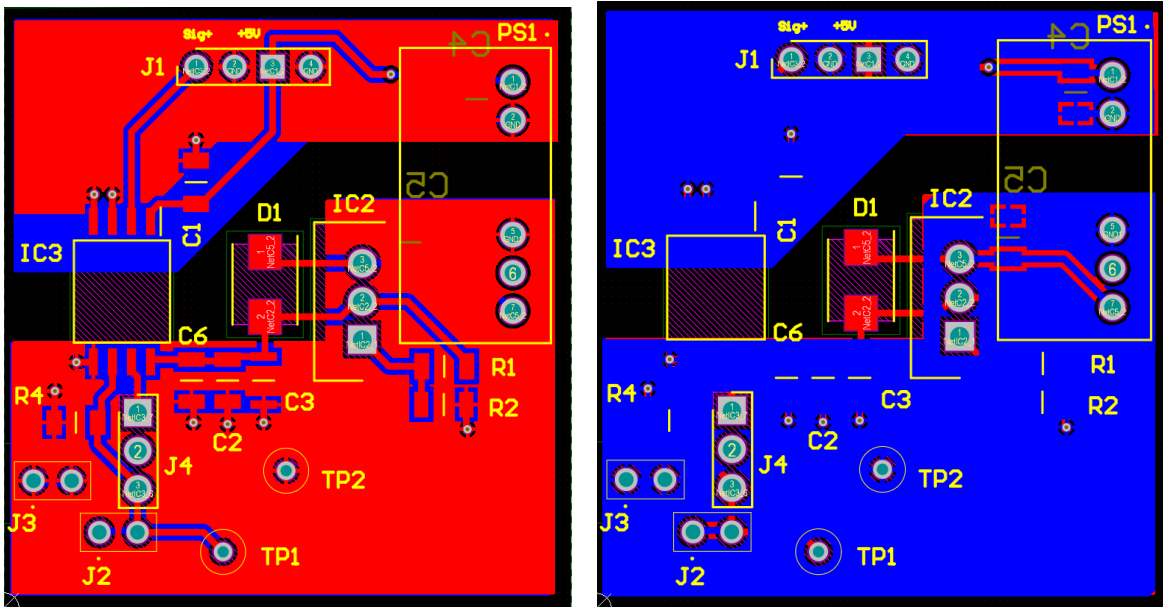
(Left) The top view and (Right) the bottom view of PCB layout for the unipolar gate driver.
